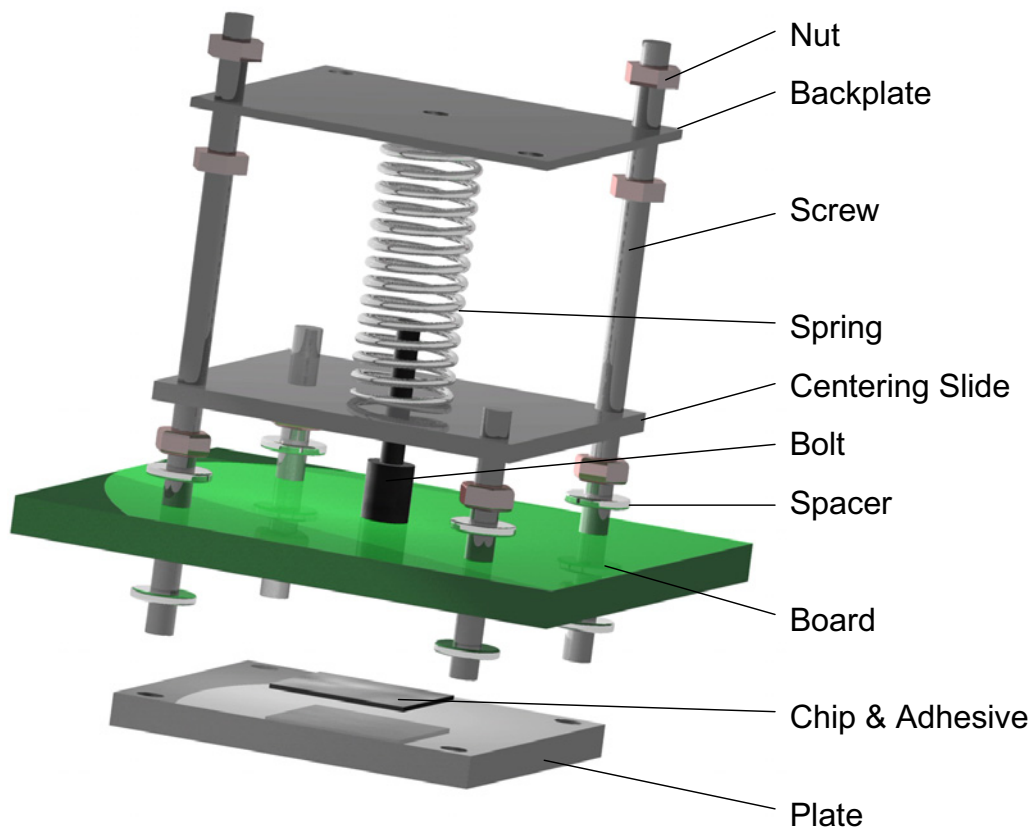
‘Exploded view’ of the test-specimen and its individual components.
